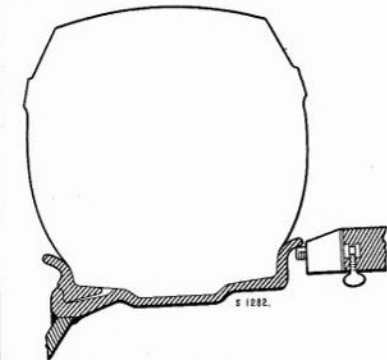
Sectional view showing the correct location for the contact foot of Churchill Wheel Alignment Gauge 121LA against the wheel rim
